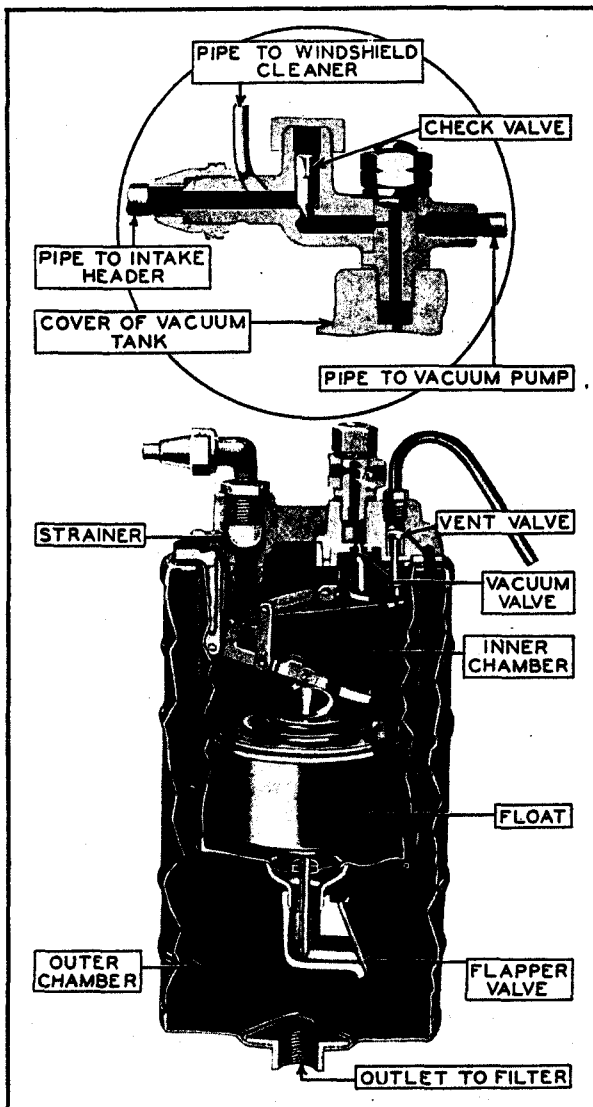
Sectional View of Vacuum Tank and Check Valve
